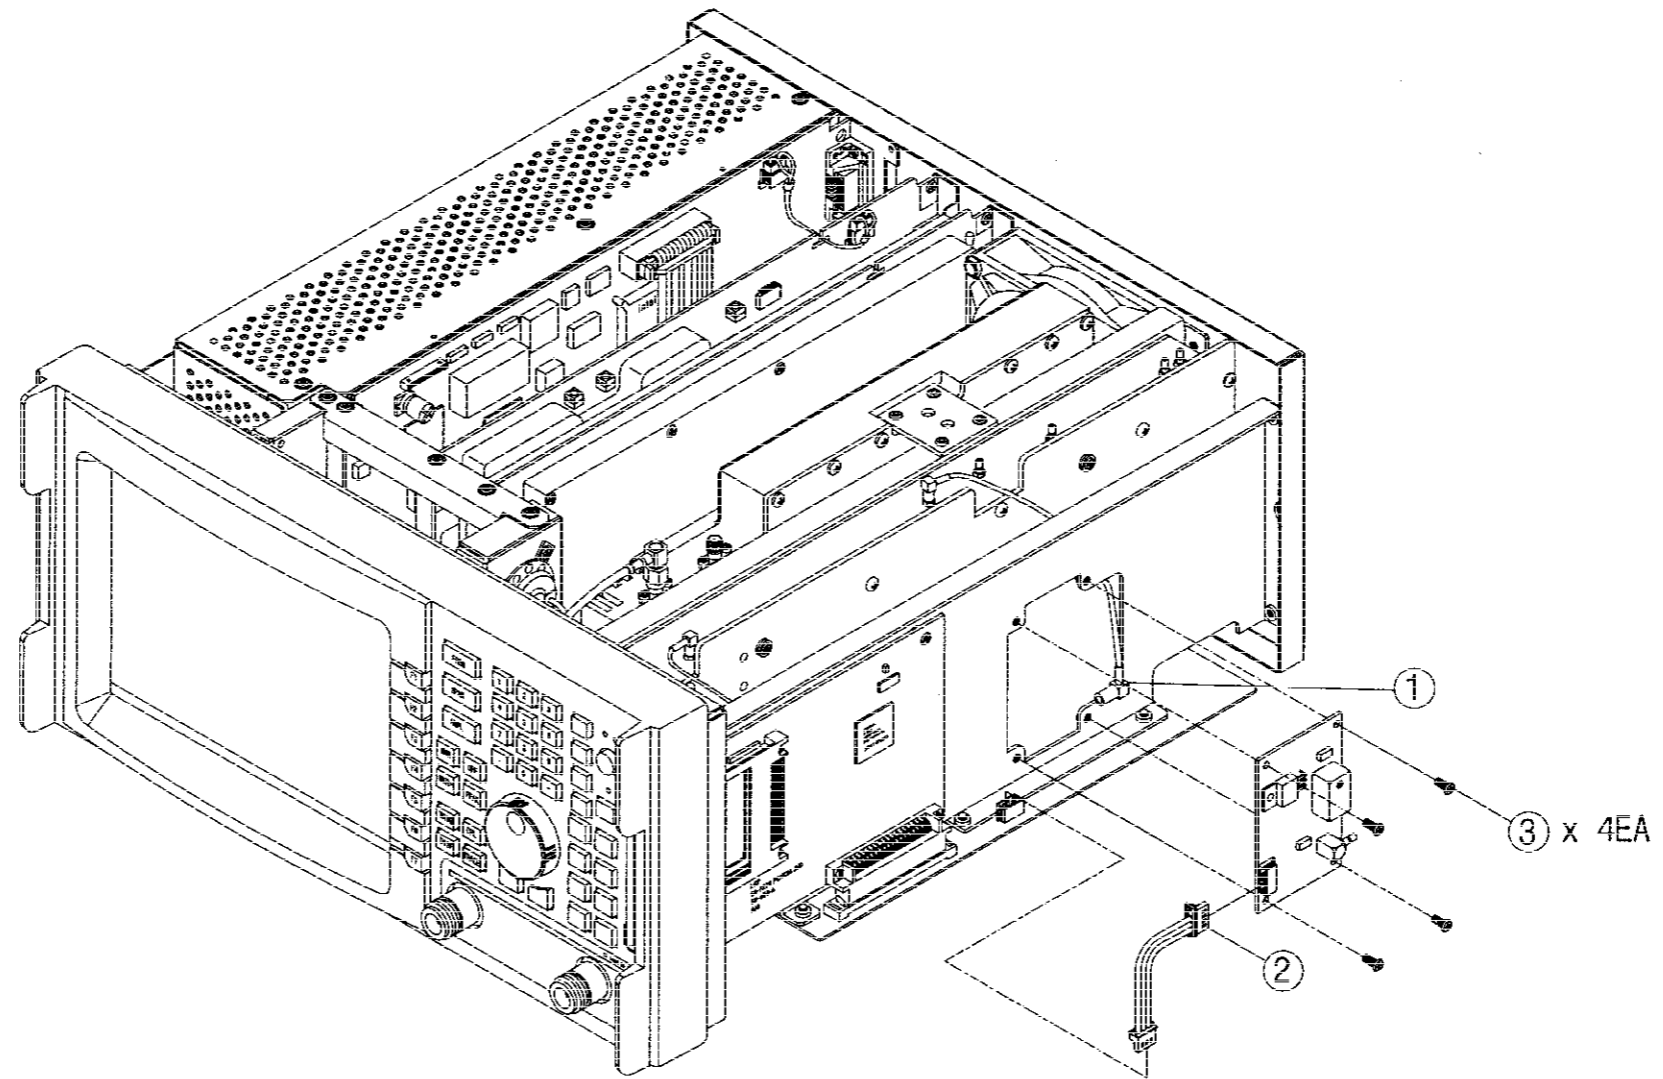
MSO/HSO BOARD (OPTION) ASSEMBLY
